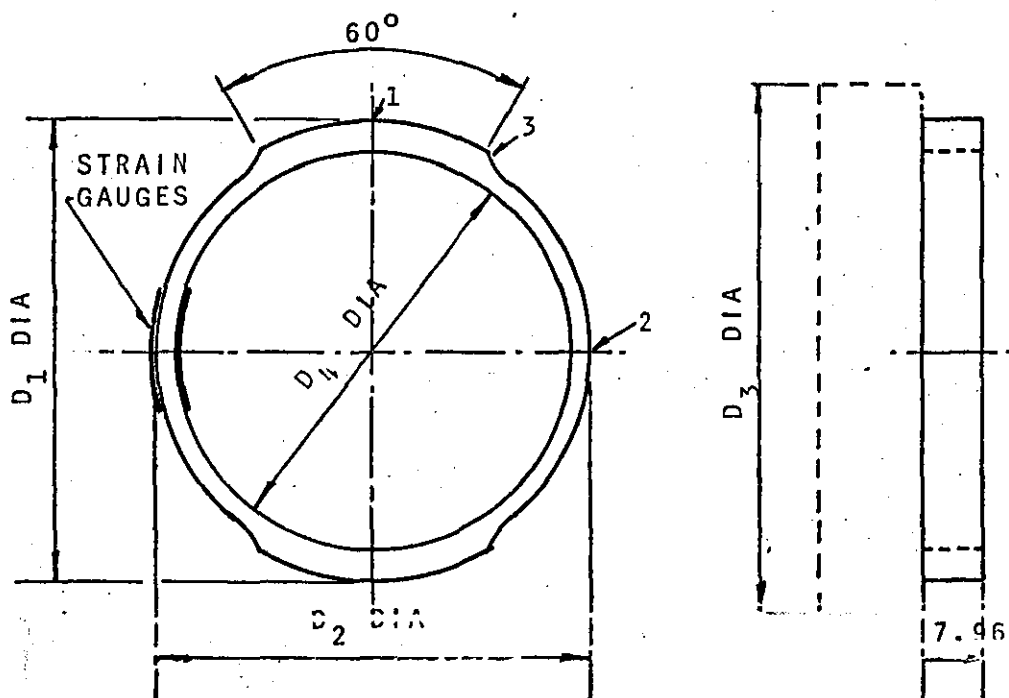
FIXTURE FOR GRINDING TRANSDUCER ELEMENTS.
